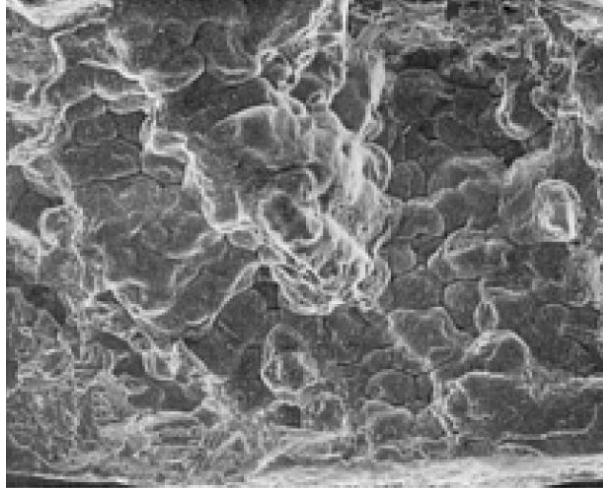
4 – Intergranular fracture surface [8].
